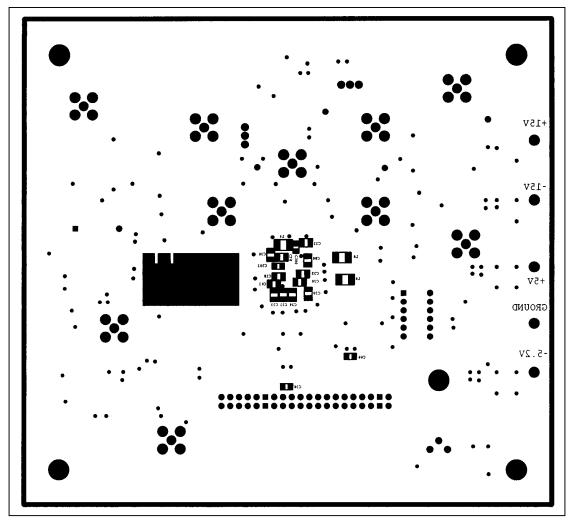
MAX2101 EV Kit Component Placement Guide—Solder Side (Positive Image)
